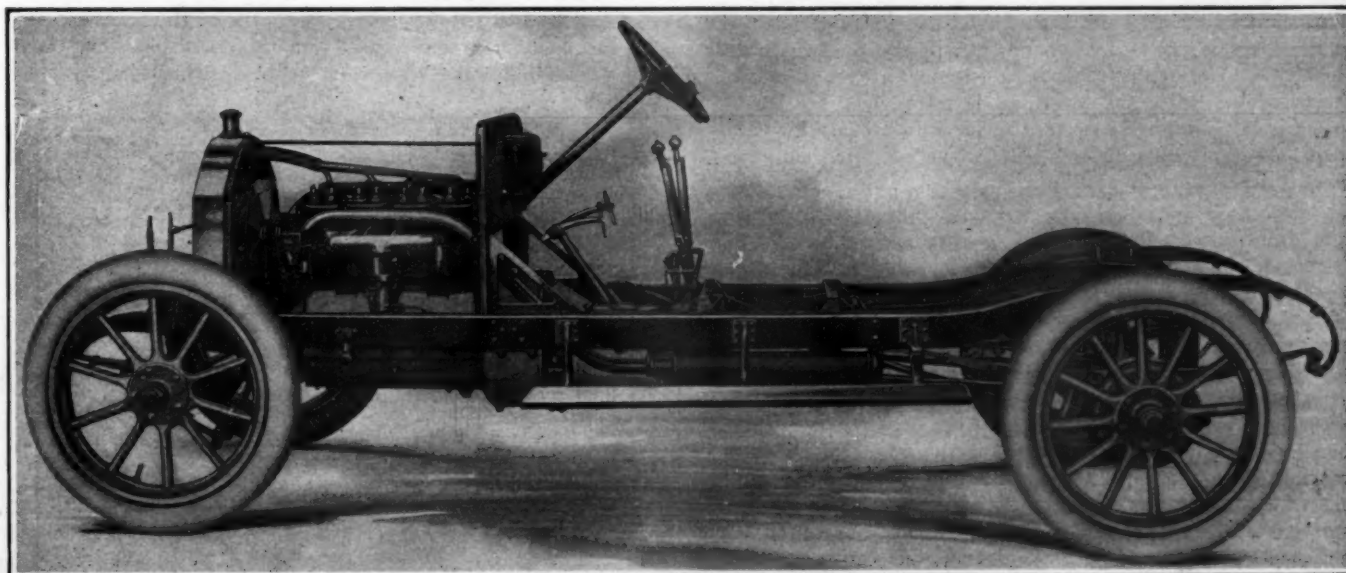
Illustrating the chassis used in connection with Models D F and E Lexington touring car and roadster
